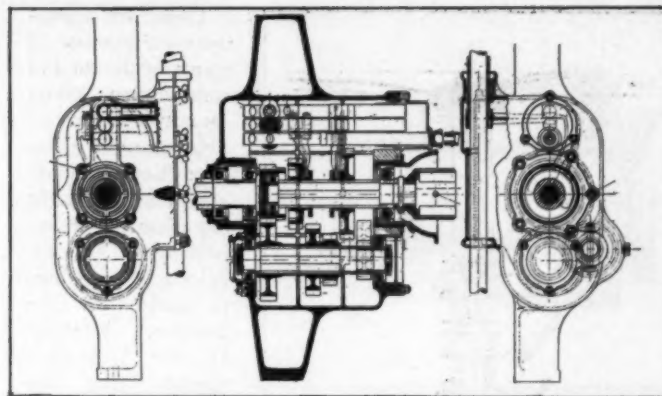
Section of the transmission gear, showing the use of annular type ball bearings, splined, prime and lay shafts and details of design
